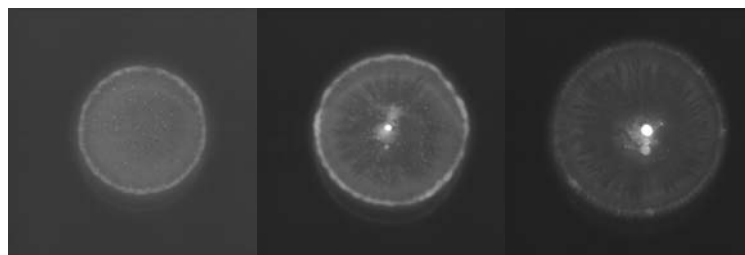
Snapshots of weld pool obtained using high-speed camera.
